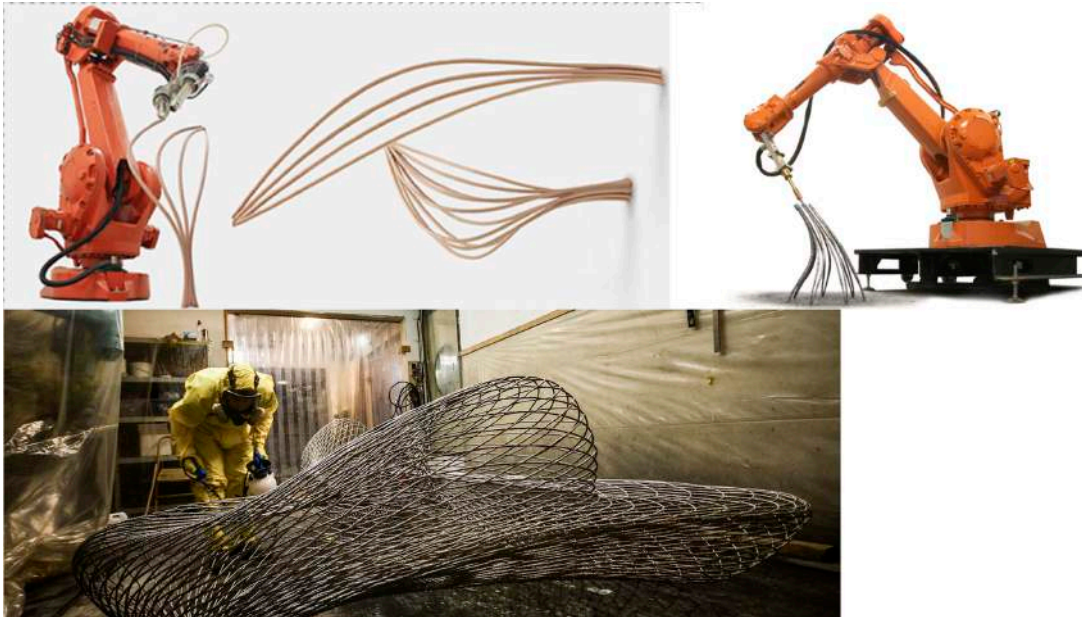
Jori Laarman's "MX3D(Dragon Bench)(prototype)" (2014)
